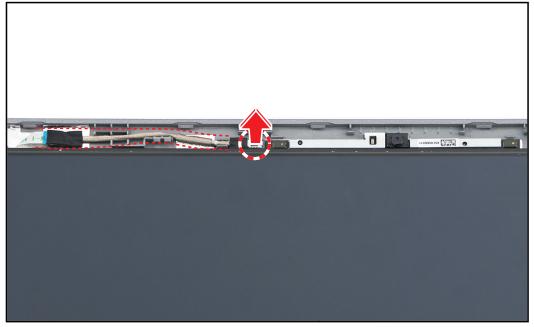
Disconnecting and Unrouting the eDP Cable
